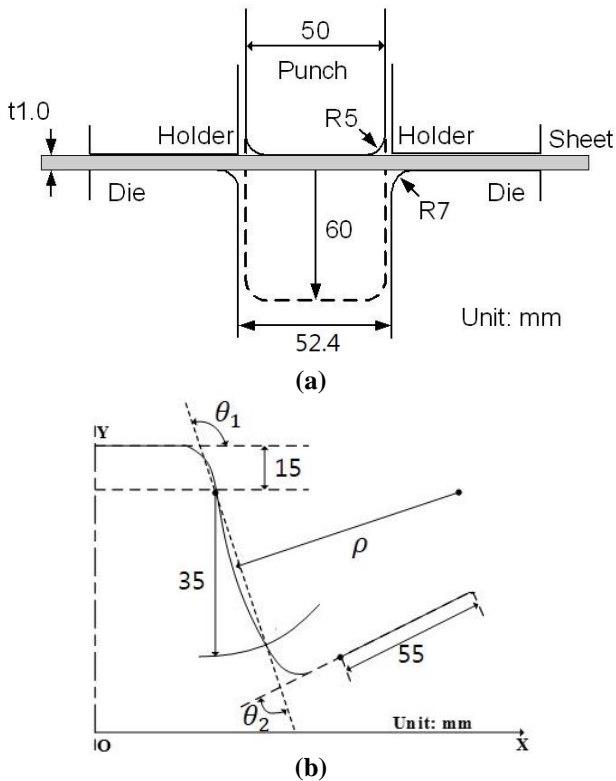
(a) A schematic view of tools and dimensions for the U-bending test and (b) definition of springback parameters
